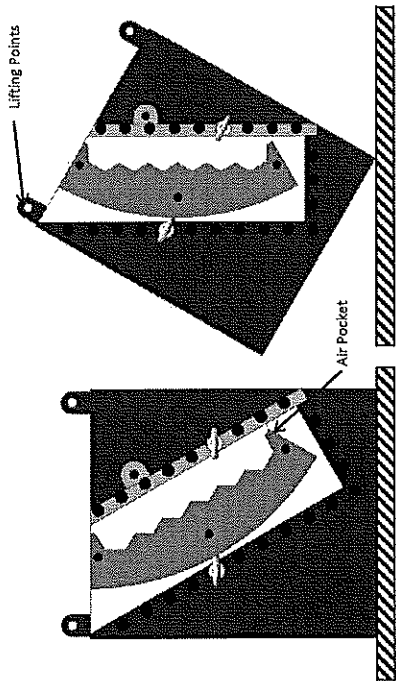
SIDE VIEW OF THE MOLD DENOTING THE AIR POCKET (LEFT) AND THE MOLD ROTATED TO REMOVE THE AIR POCKET DURING THE INITIAL FILLING STAGE OF THE CASTING PROCESS (RIGHT). THE FRAME WALL PLATE HAS BEEN REMOVED FOR CLARITY.
